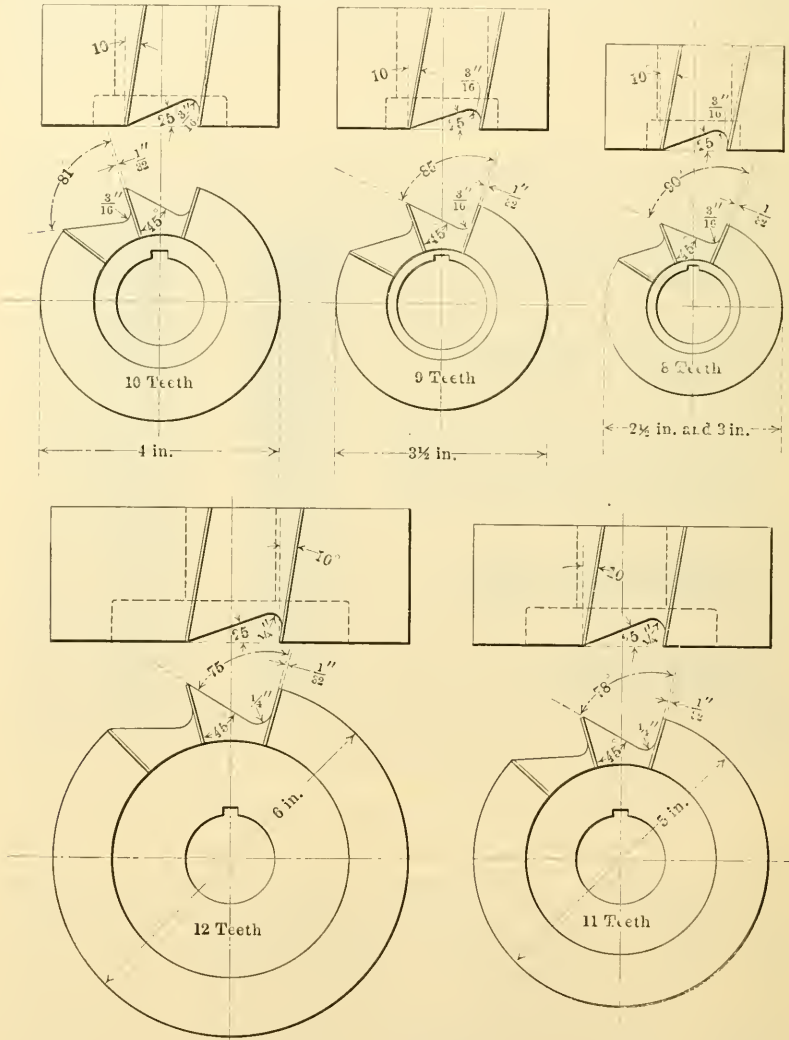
NEW TYPE OF SPIRAL SHELL CUTTERS
